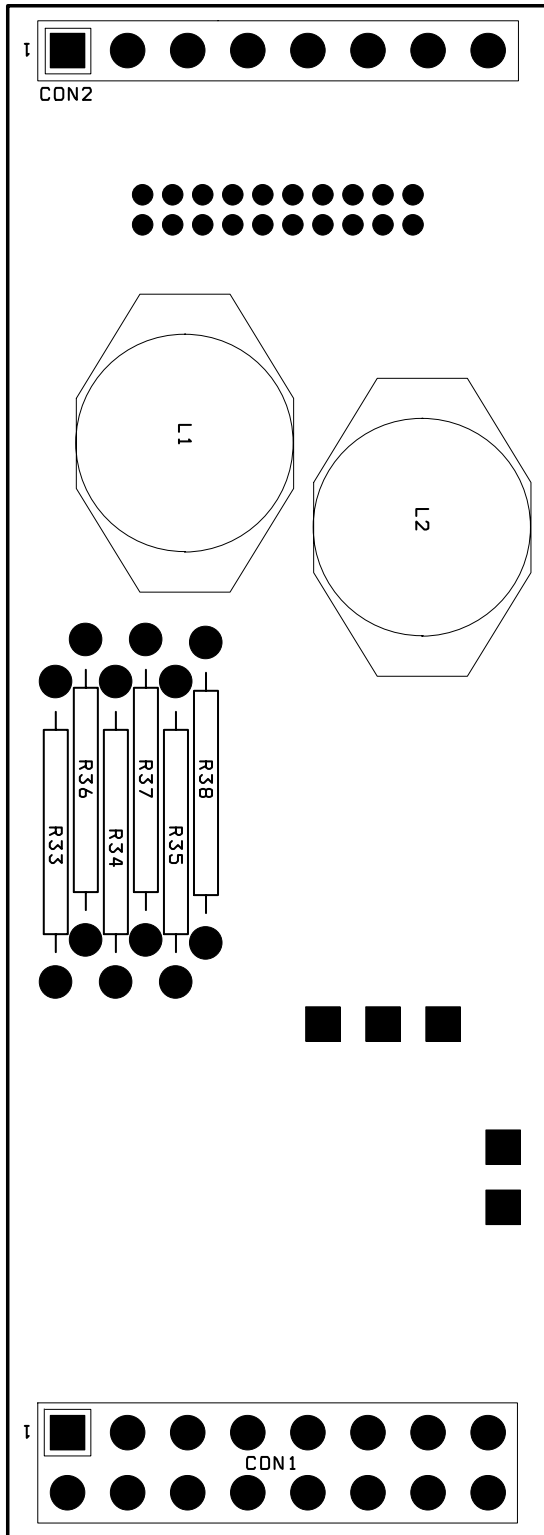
S/T Port Line Interface Subassembly with Coding Plug board (bottom side components)
